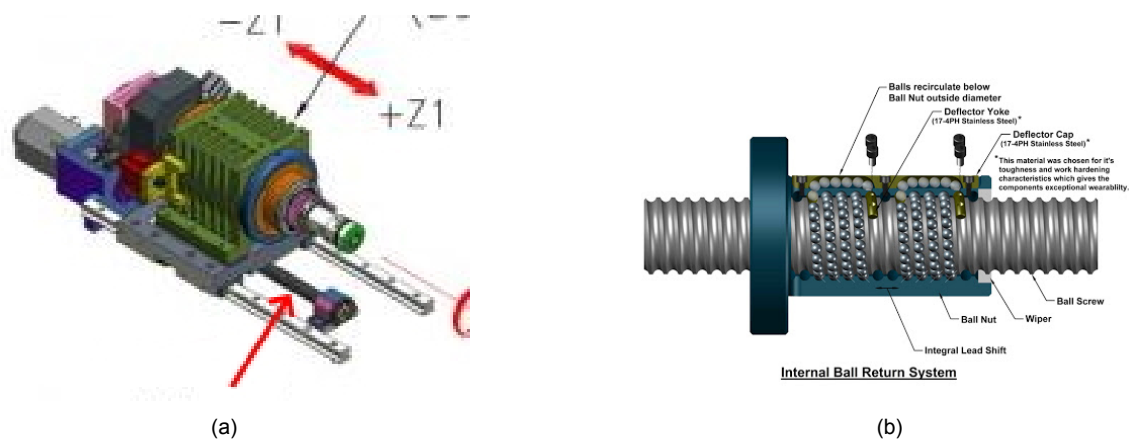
(a) The linear actuator (ballscrew) of the main spindle axis. (b) A closeup of the structure of a ballscrew [6]
